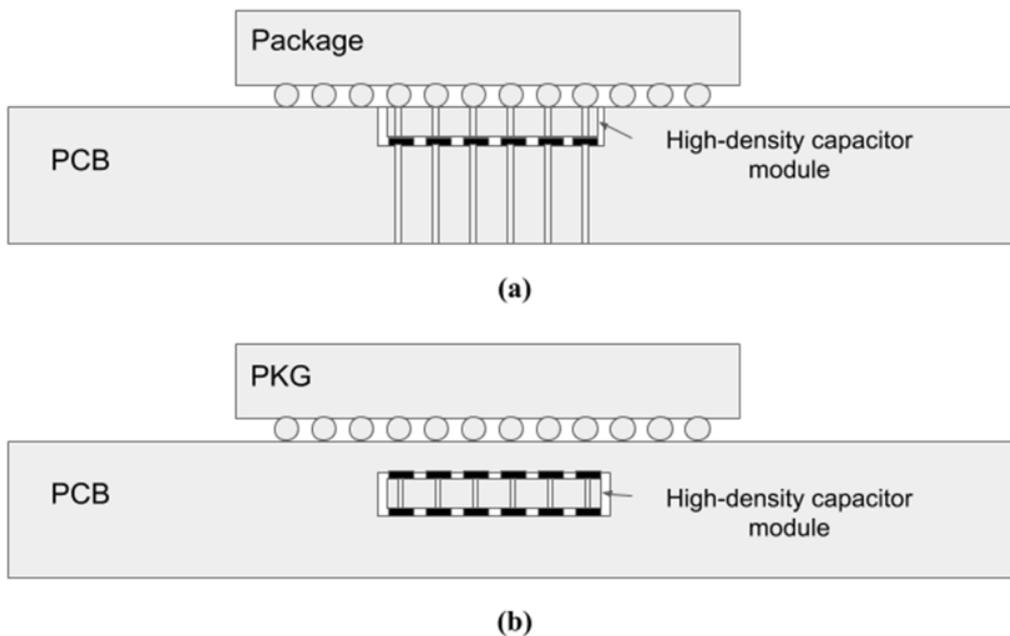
Integration into a PCB surface cavity; (a) top layer; (b) inner layer
